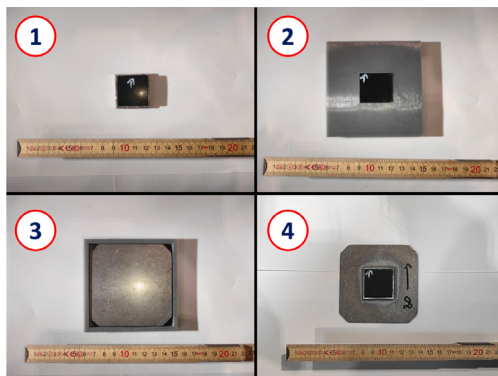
Procedure for gluing samples: (1) Rubber sample on first steel plate; (2) Jig positioning (front); (3) Jig positioning (rear); (4) Final result.
